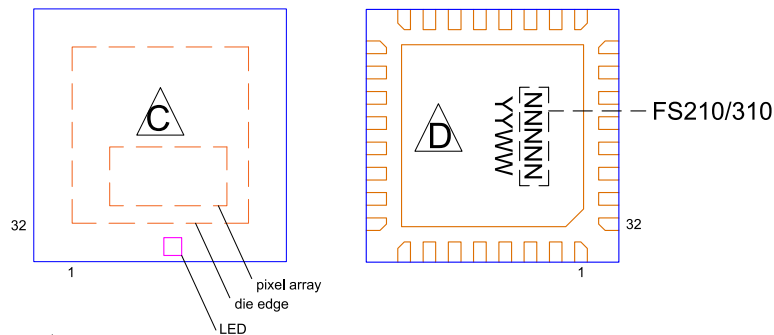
Package Outline Drawing. Only the FS310 has the LED in the QFN package. All other dimensions are identical.
